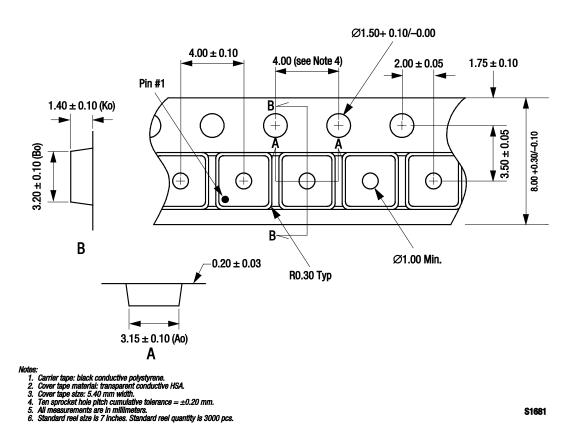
SKY12324-73LF Tape and Reel Dimensions
